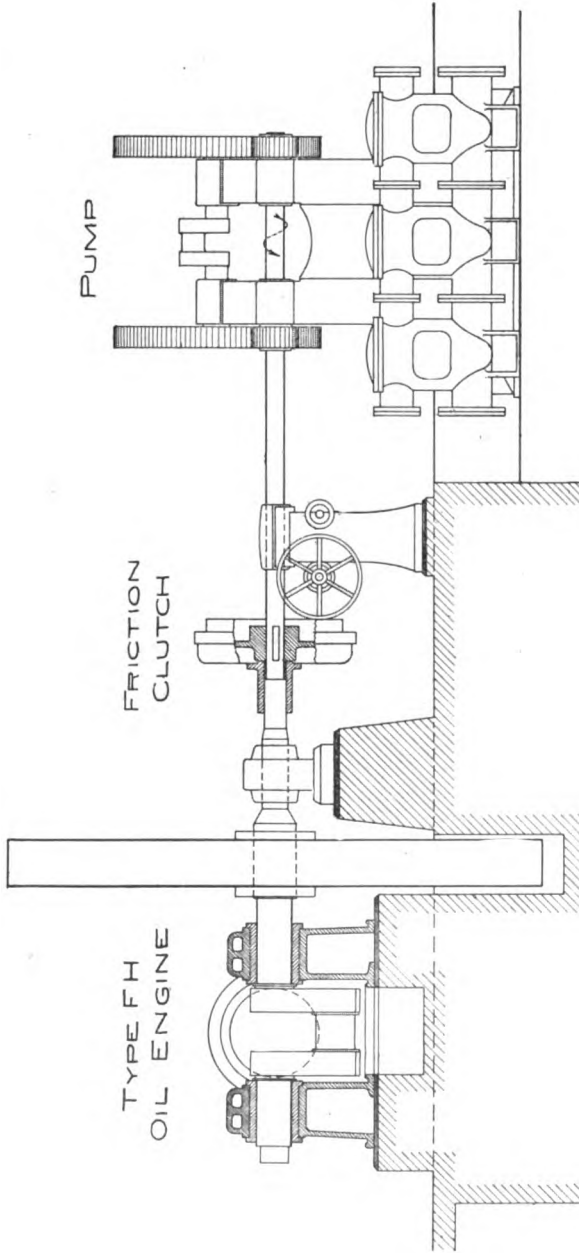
ENGINE AND PUMP INSTALLED WITH CLUTCH CONNECTION
